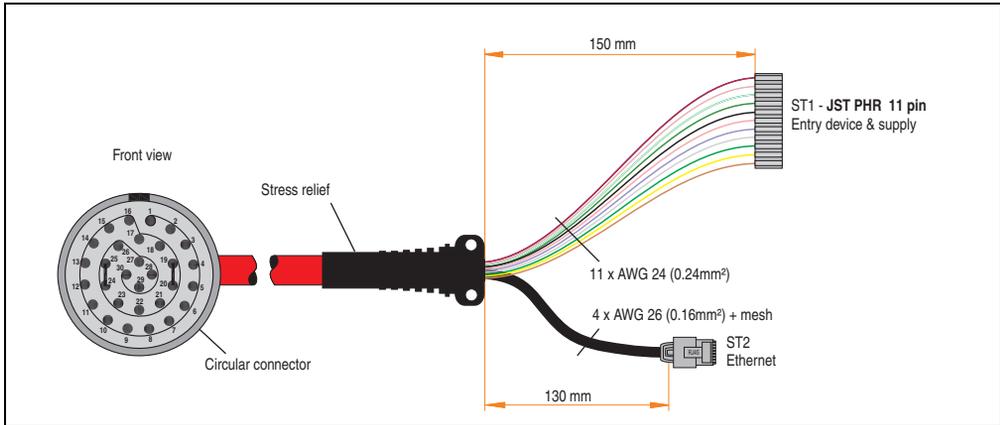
Cable specifications - Attachment cable 5CAMPH.0xxx-30
